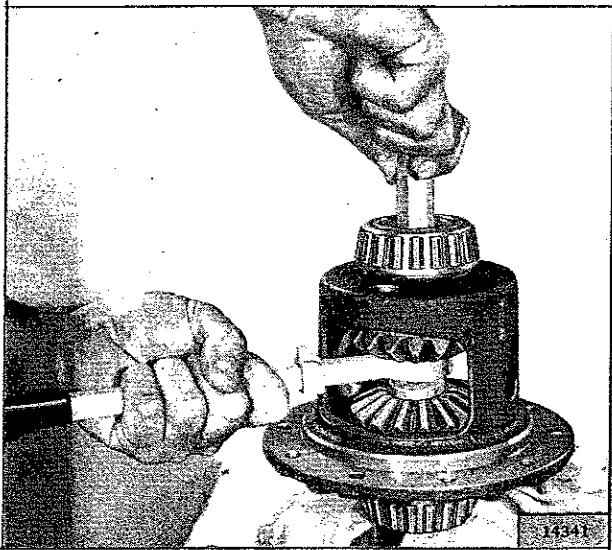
THREADING FORCING SCREW INTO ROTATING TOOL
